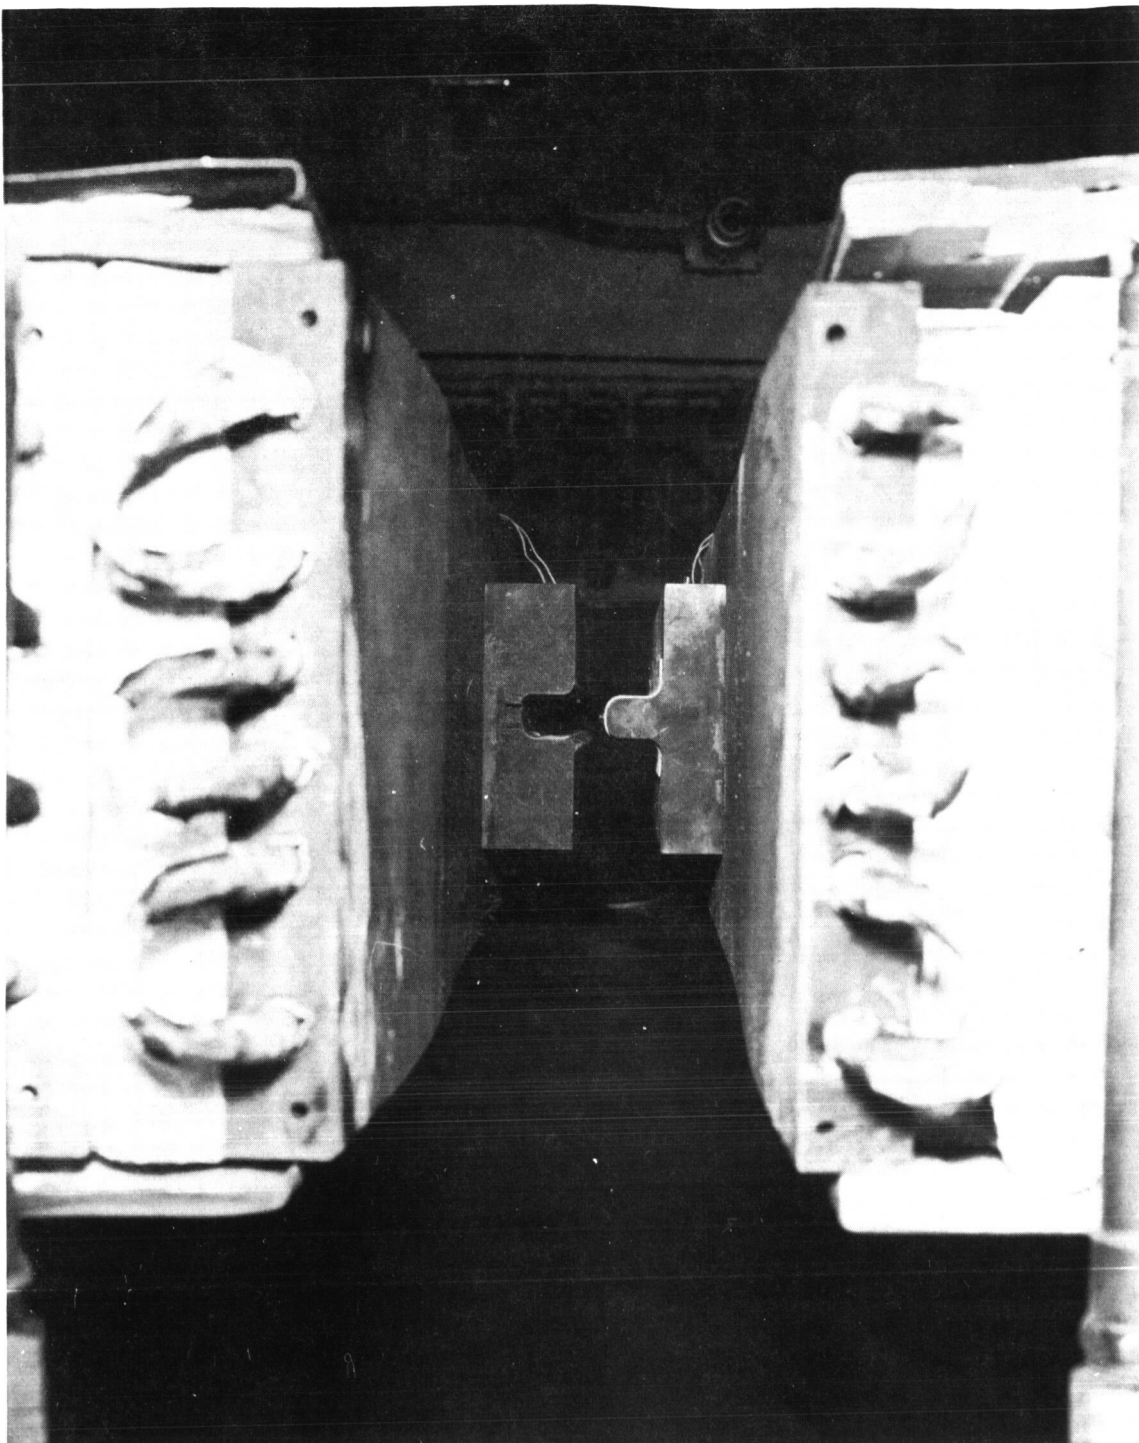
FORMED "HAT" SECTION - END VIEW
